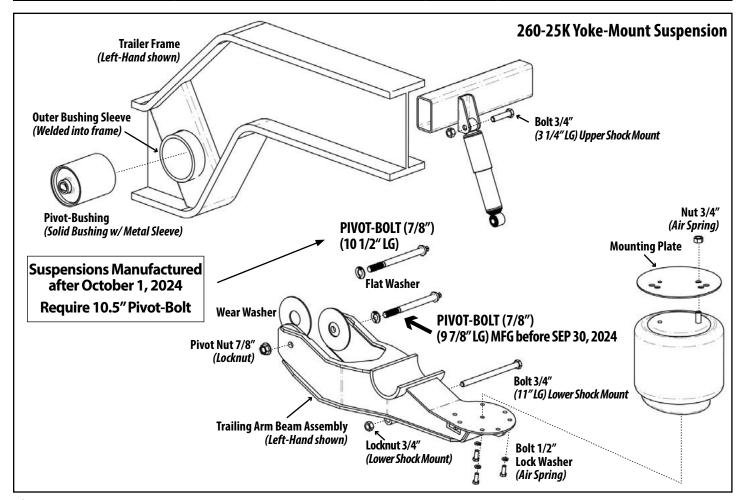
260-25K Yoke-Mount Trailer Suspension Components Refer to suspension model engineering drawing for component part numbers.
